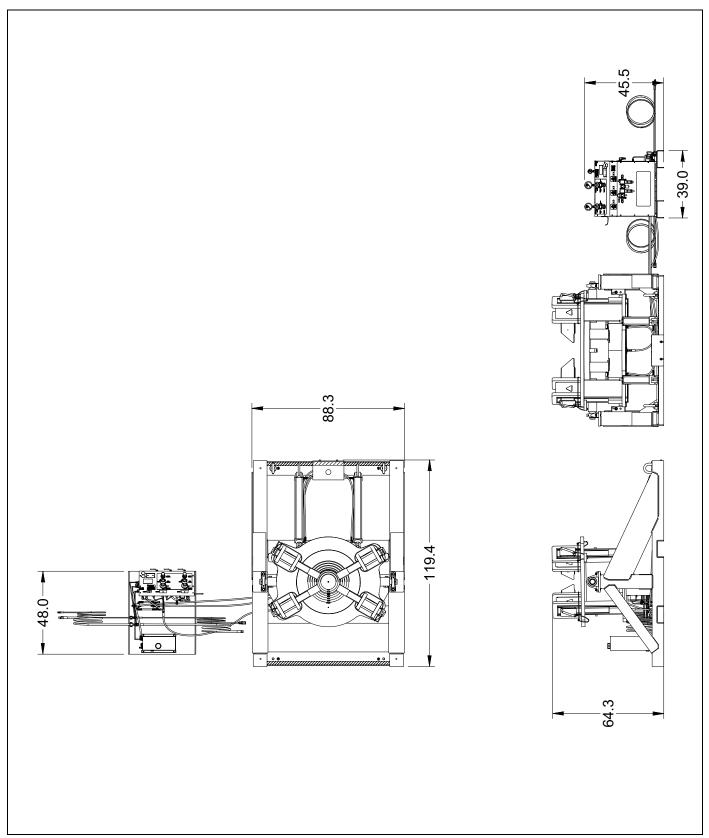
UFV-24-300T CLAMP FIXTURE DIMENSIONS
